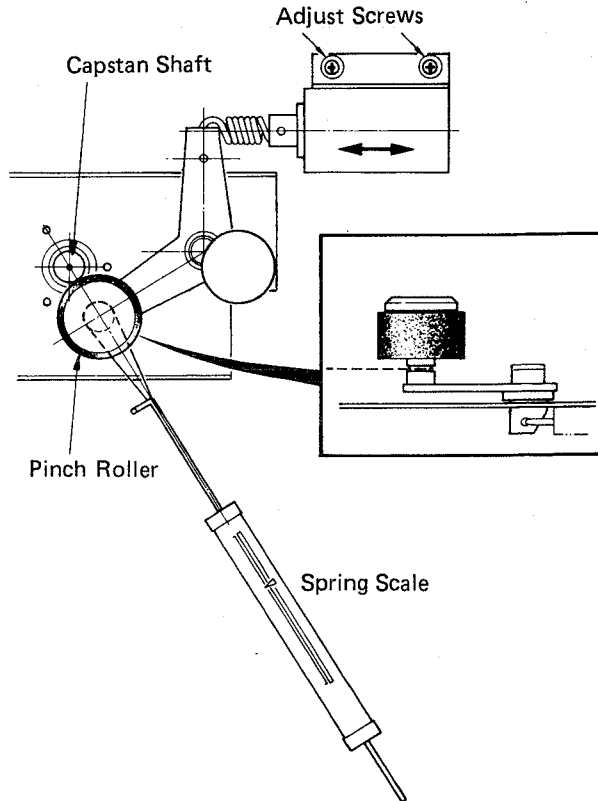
PINCH ROLLER PRESSURE ADJUSTMENT
